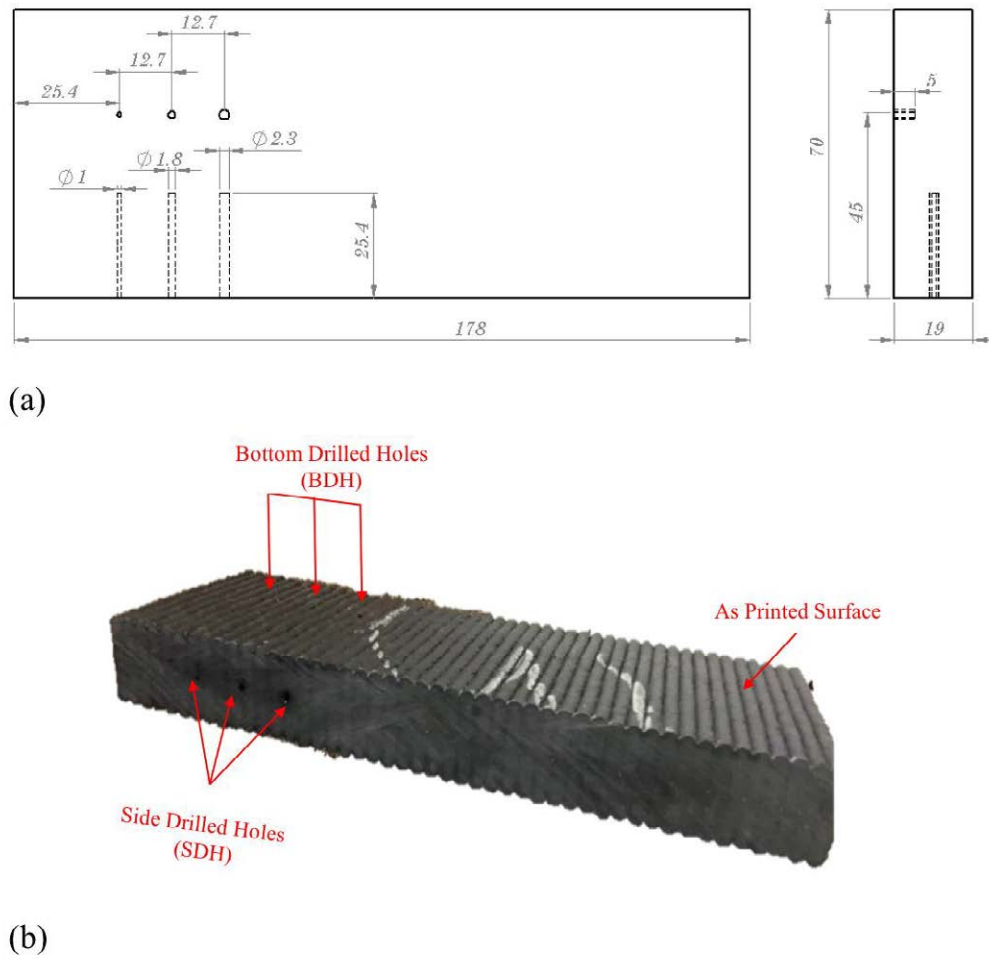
Additively manufactured ABS / CF 20% by weight; (a) Schematic drawing of the sample and drilled holes (artificial defects) used in the experiments (Dimensions are in mm), and (b) Actual printed sample showing side drilled holes (SDH), and bottom drilled holes (BDH)
